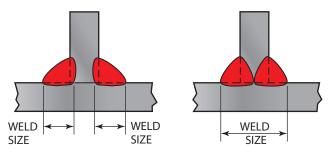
If the total weld sizes are equal, then both tee joints would have equal strength.
